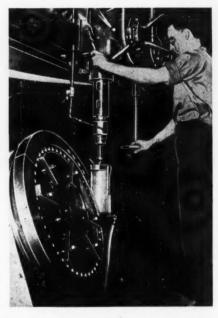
Drilling the "Nozzle" Side of a Nozzle
